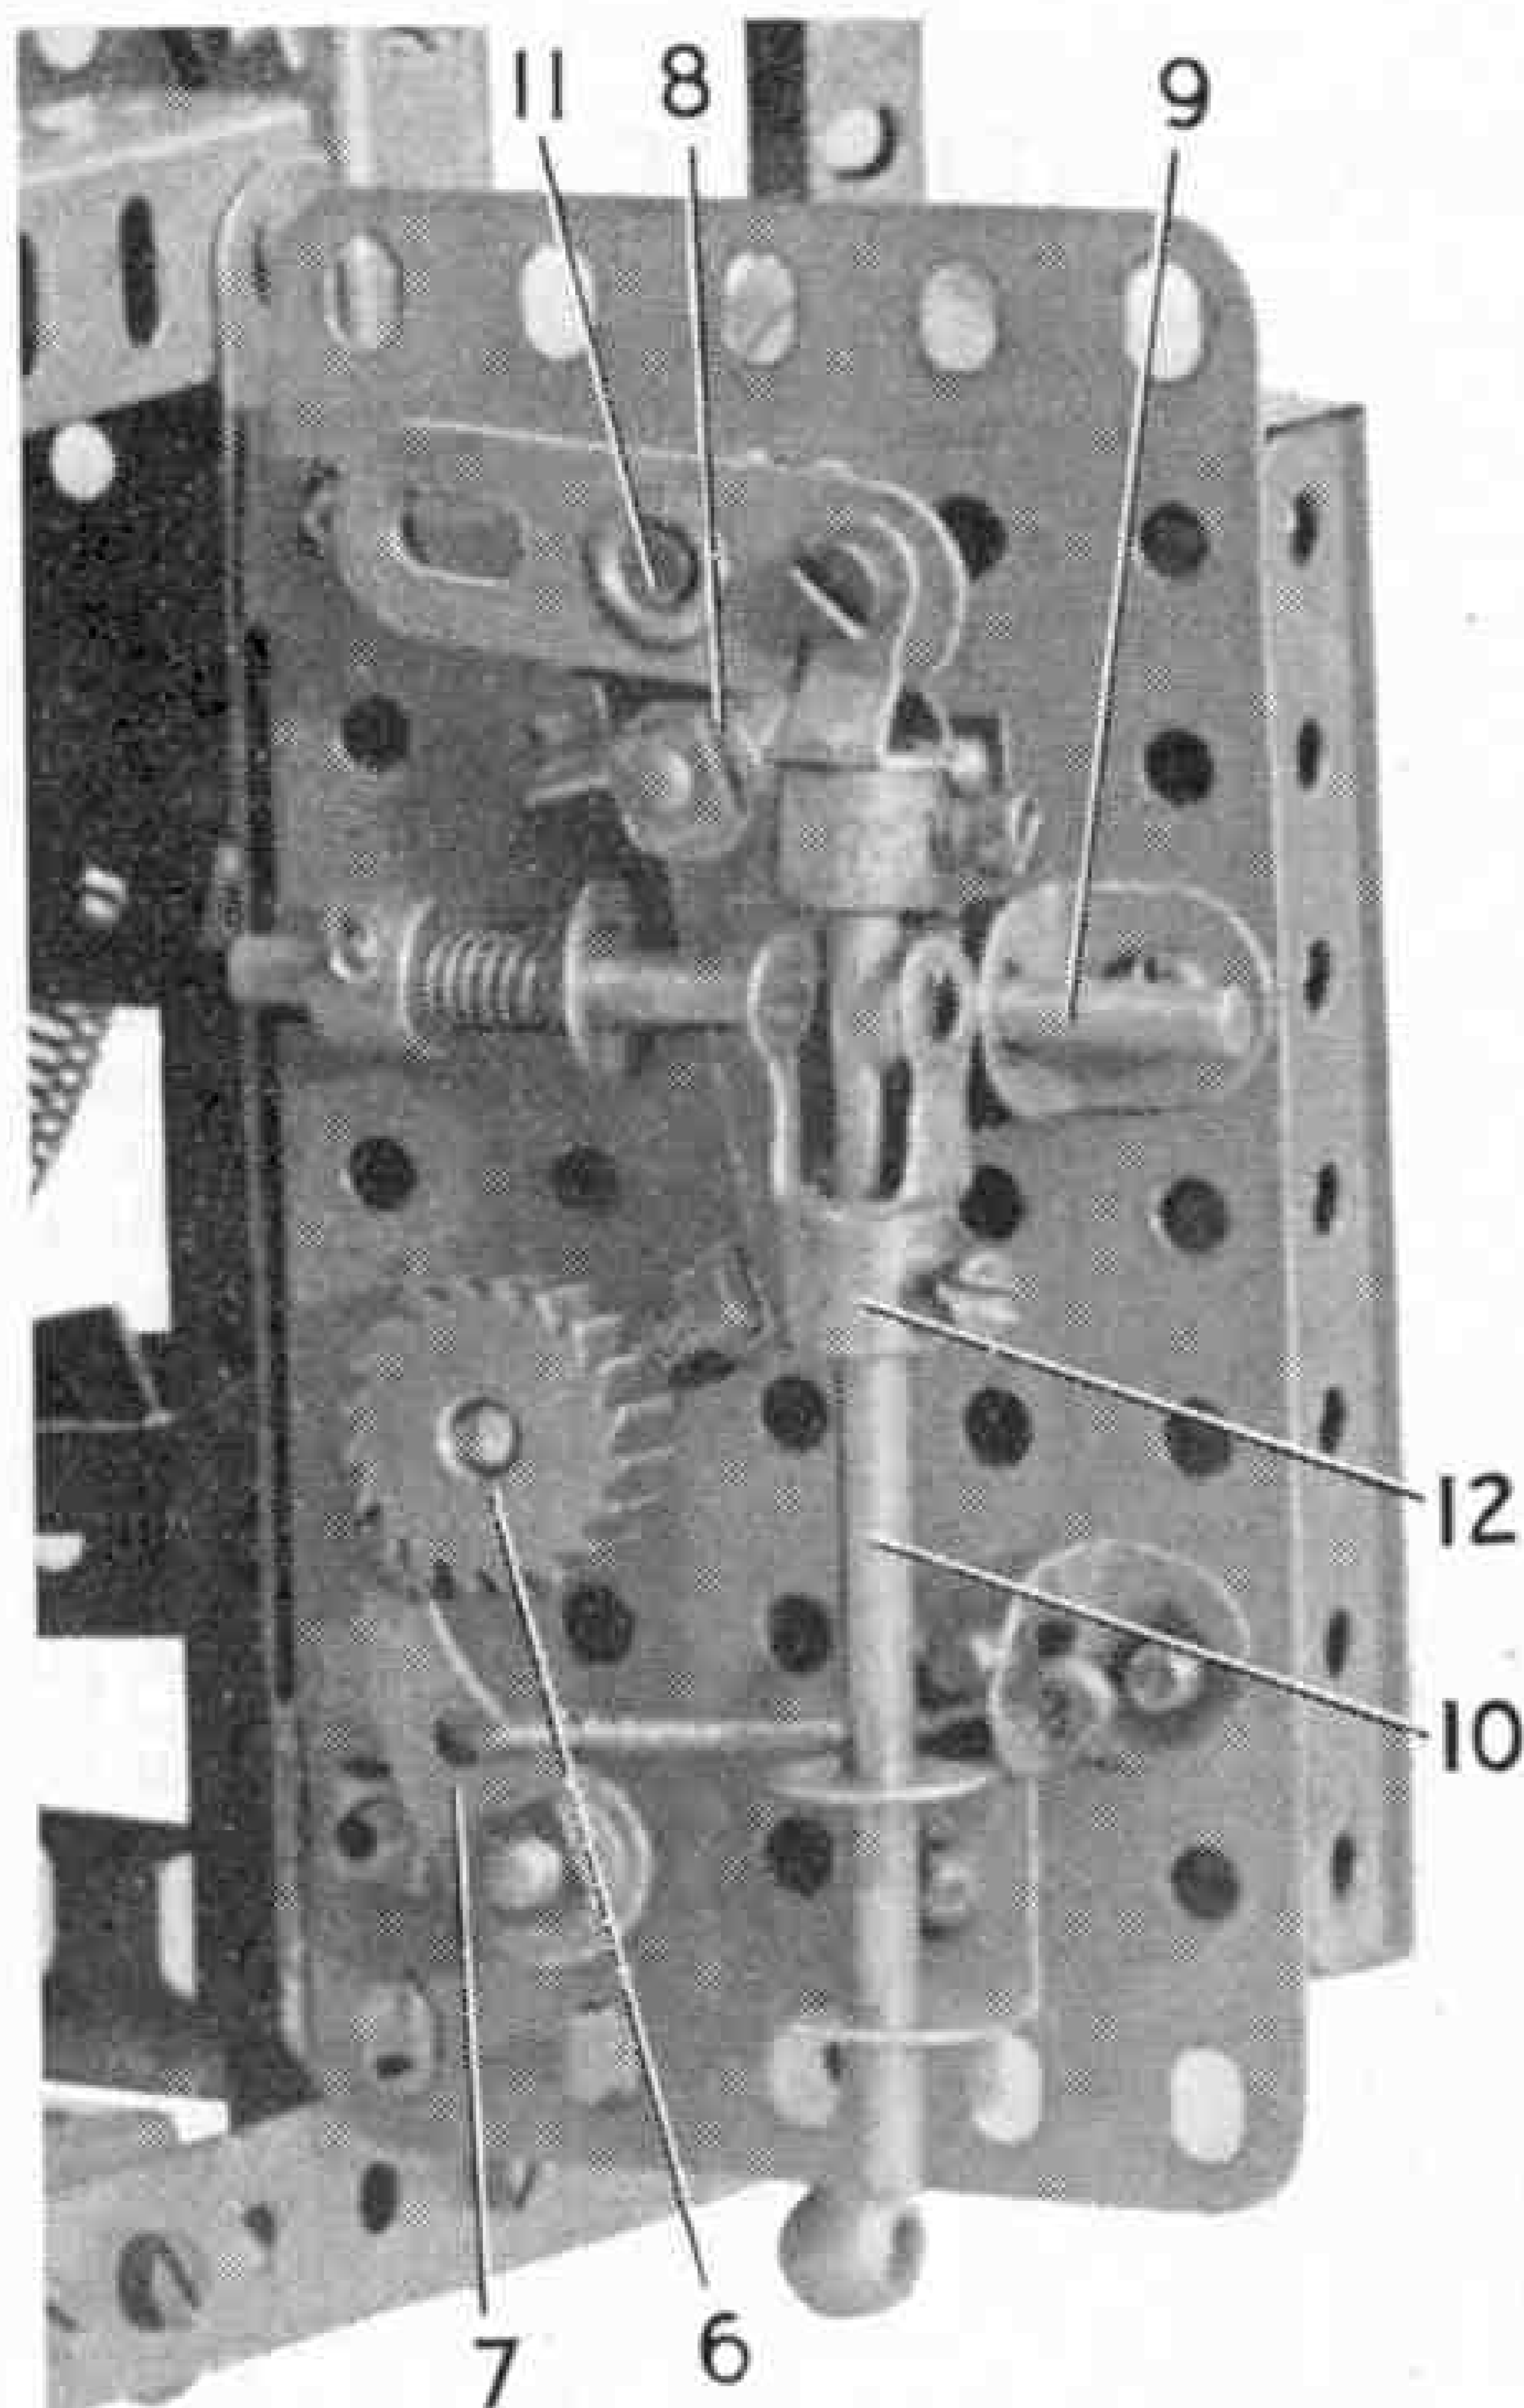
The door to the coin box, showing details of the lock mechanism.
